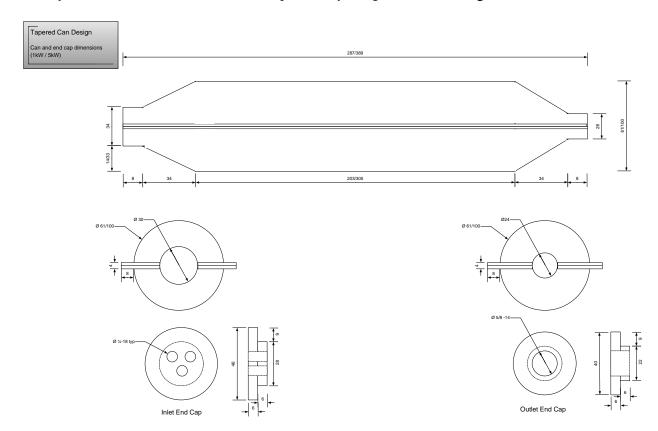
ATR Can – Seam-welded Tapered Body Design Layout
